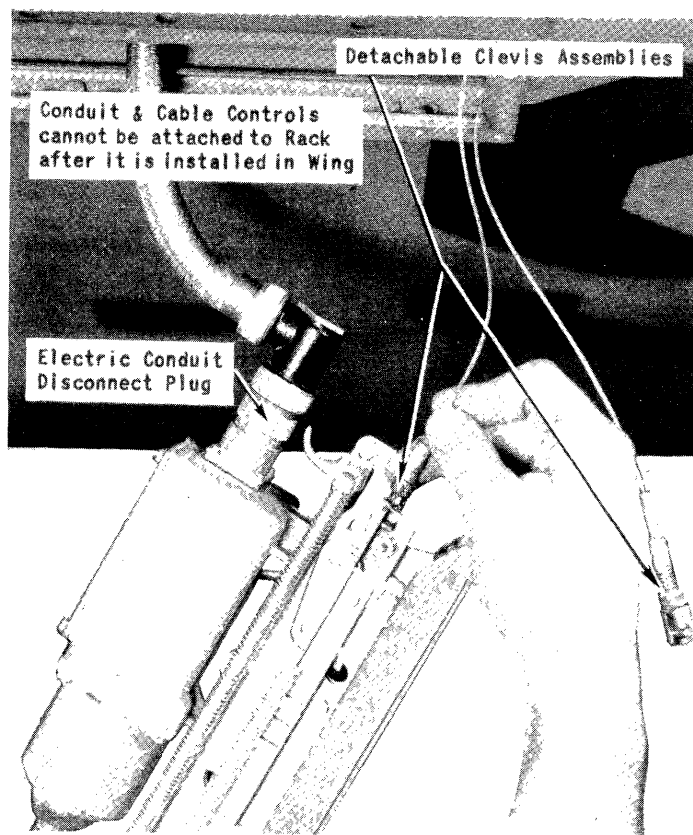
Attaching Control Cable Clevis End to Bomb Rack
